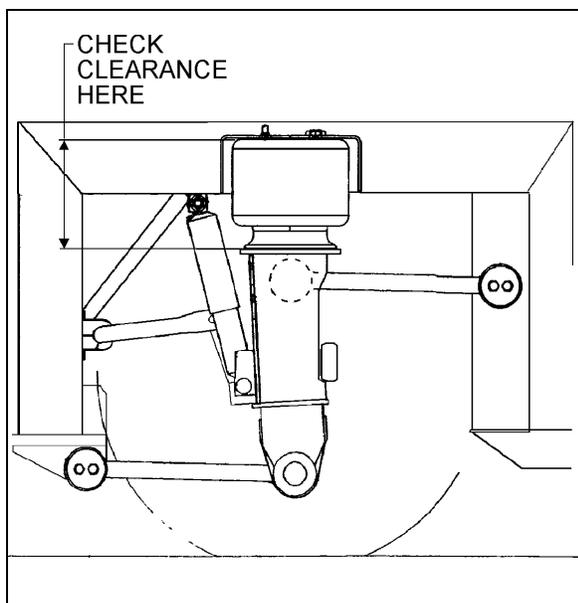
TYPICAL AIR SPRING CLEARANCE 16018
